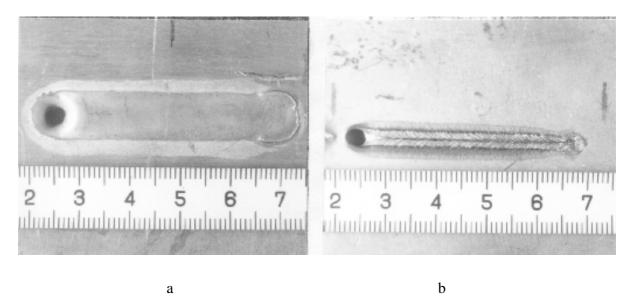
Photographs of the weld bead with matched gas and welding current rise slopes during the start-up segment (corresponding to experiment 2 in Table 2): (a) front side; (b) back side
